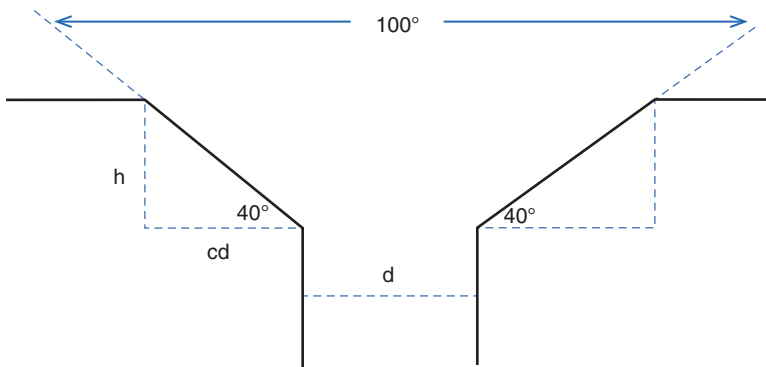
Schematic of the countersink used to calculate the bearing load
